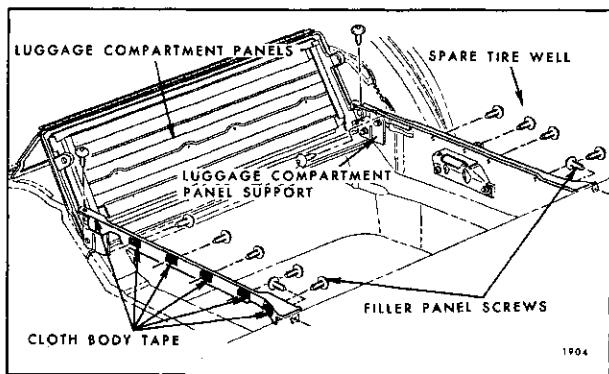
Rear Compartment Pan Side Filler Panels
